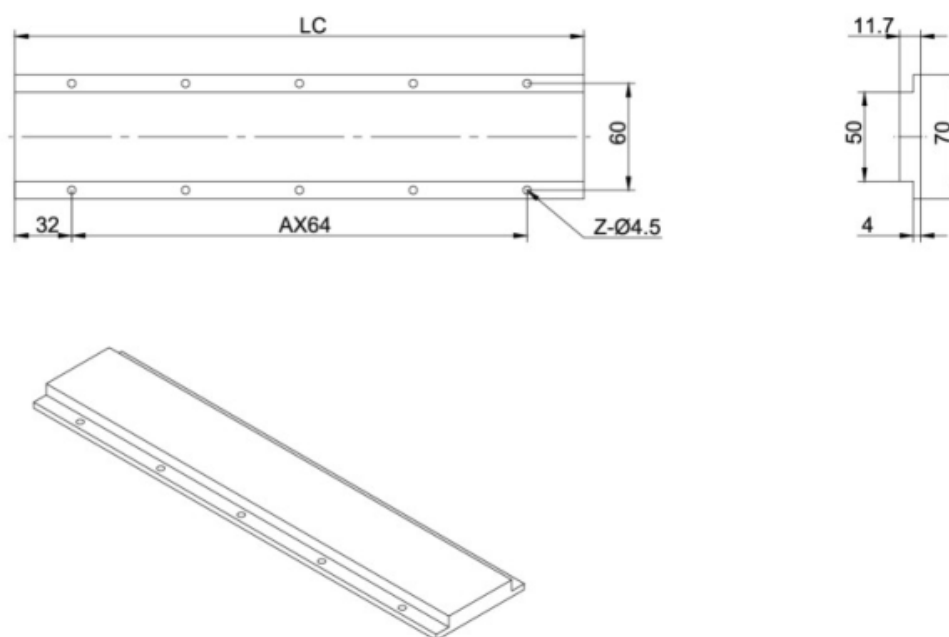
Dimensional drawing of WZCR-Z70 series stator
